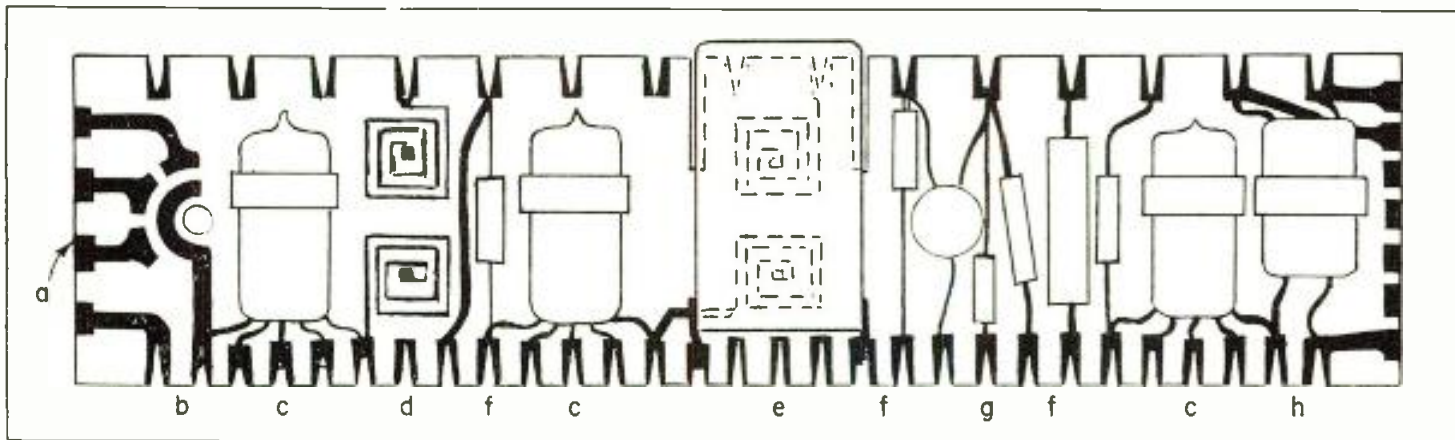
Complex circuits using coils, transistors, and miniature tubes are easily converted to notched board mechanized assembly
